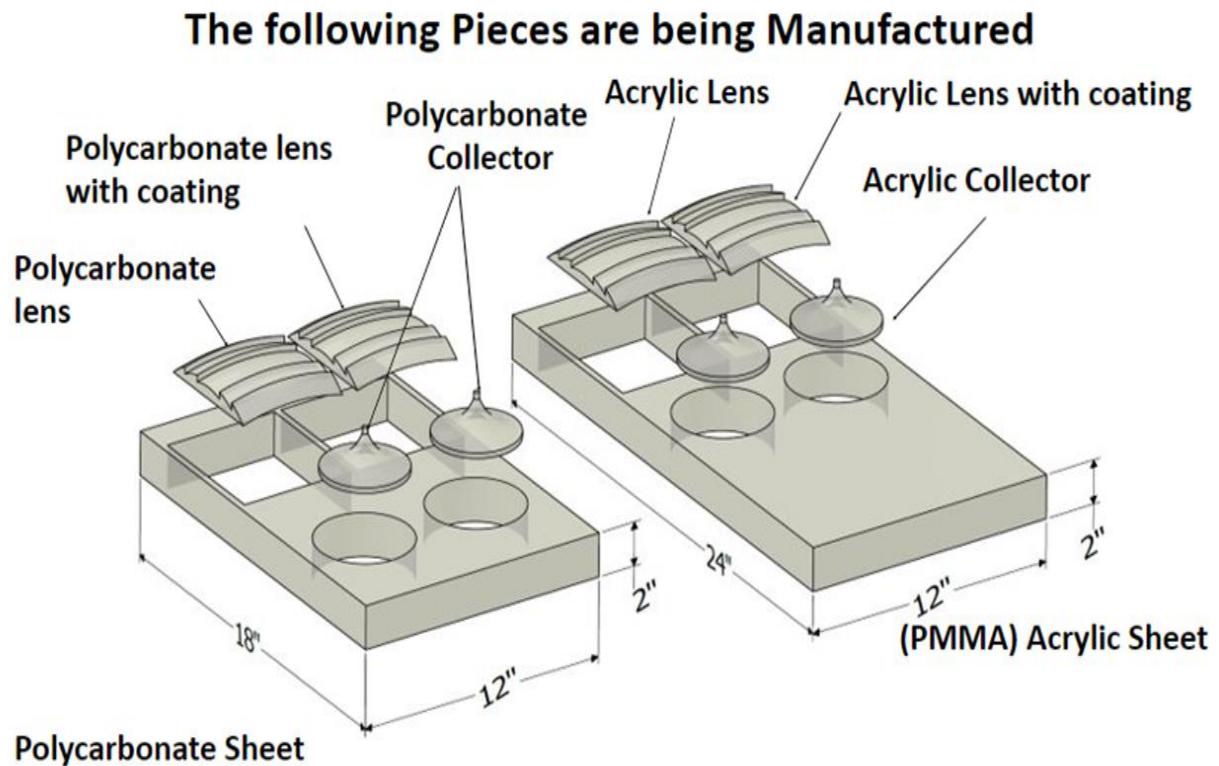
Each material sheet will be machined to produce two lenses, one with coating and one without coating and two collectors of each material without coating.
